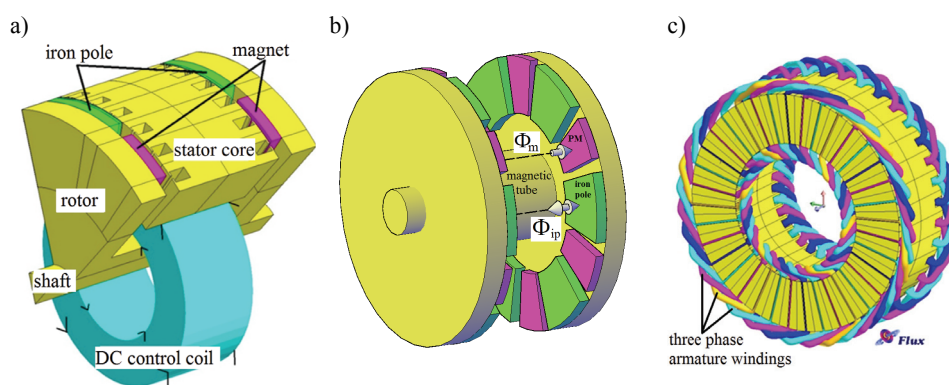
The structure of FCAFPM machine a); rotor parts b); stator parts c)
